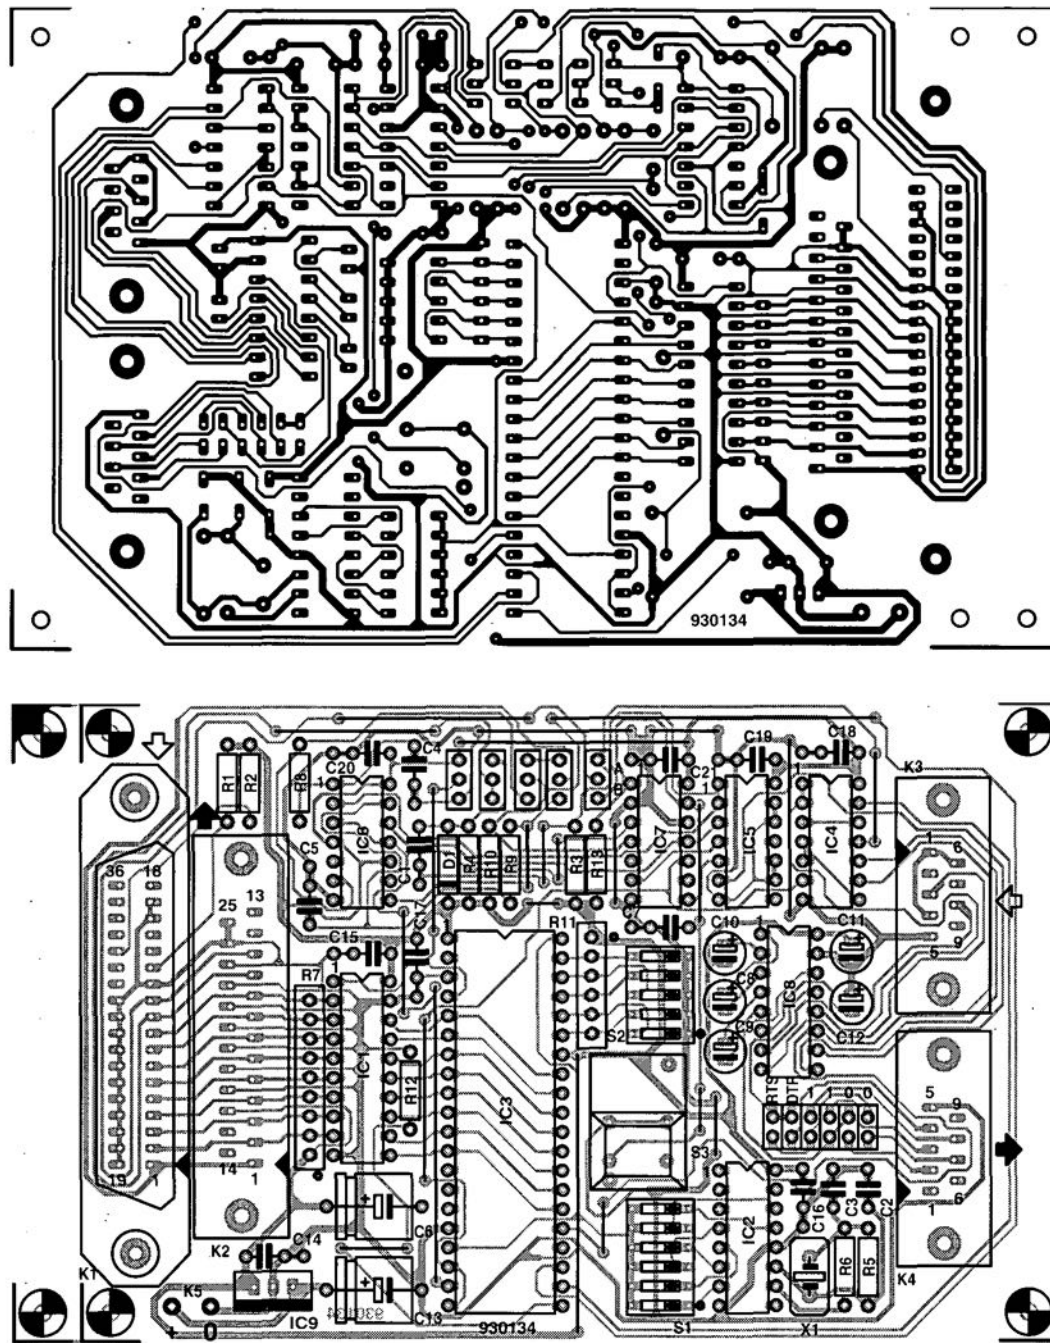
Track layout and component mounting plan of the printed circuit board designed for the converter.
